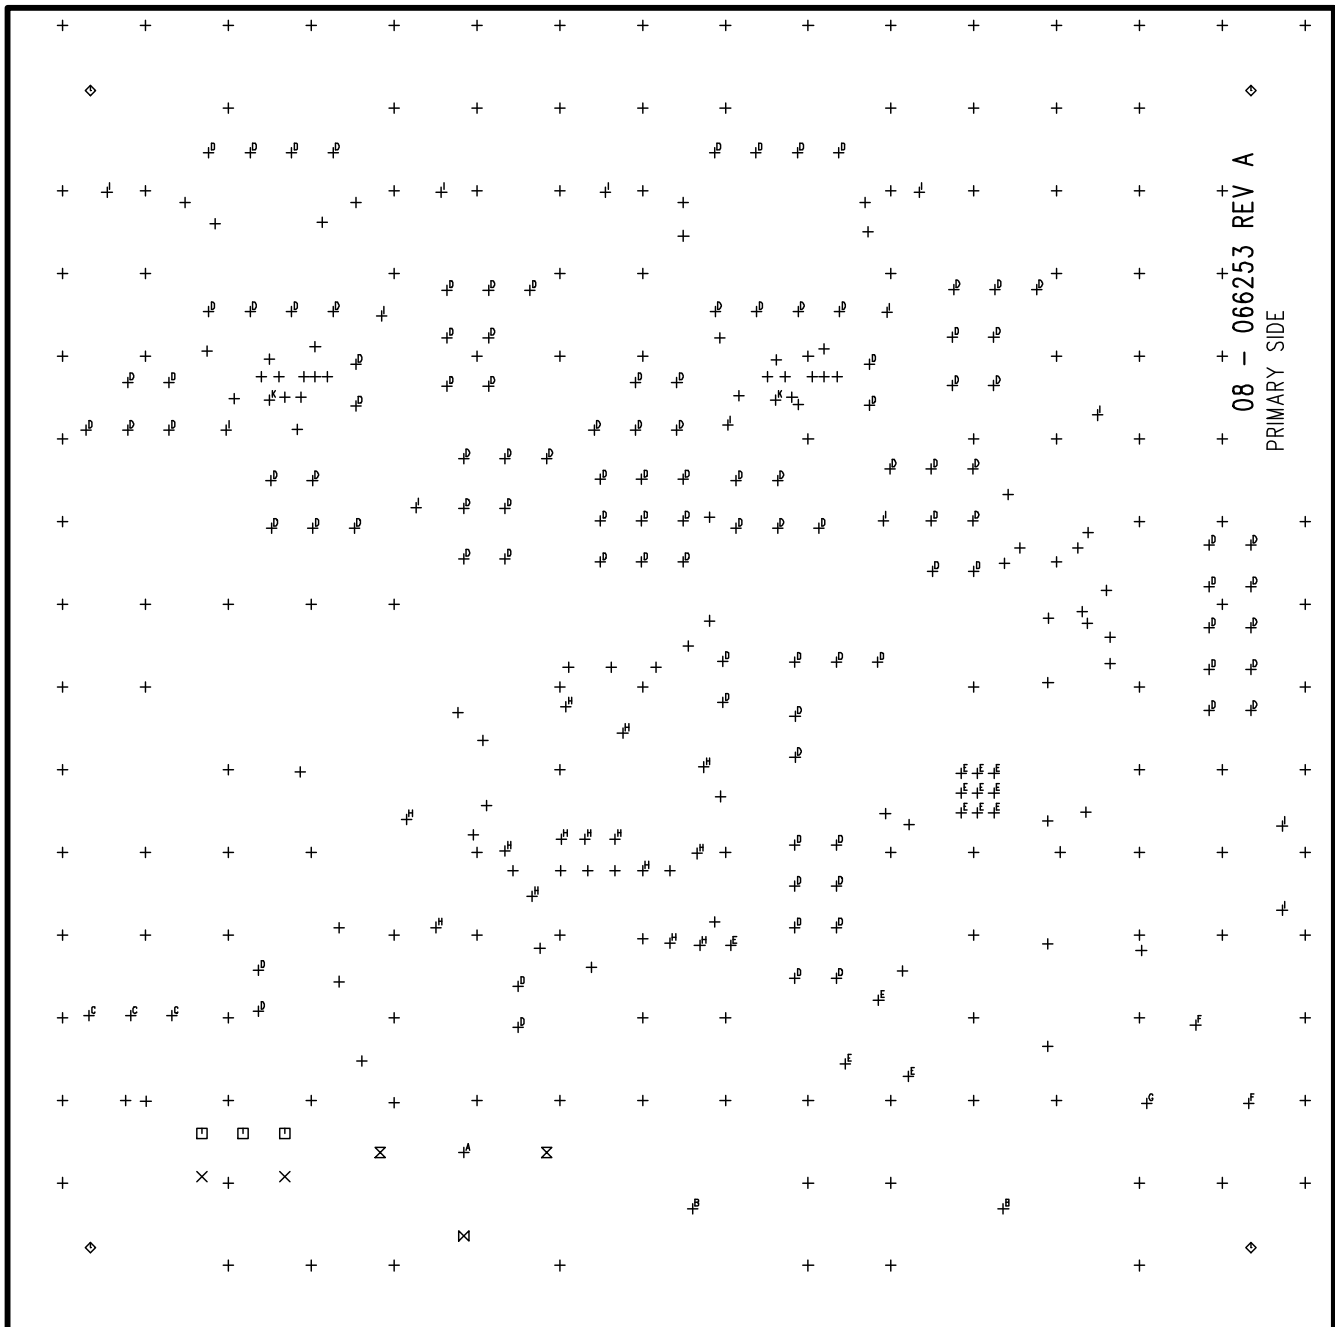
EVAL-SSM6515Z Layout: Fab Drawing
